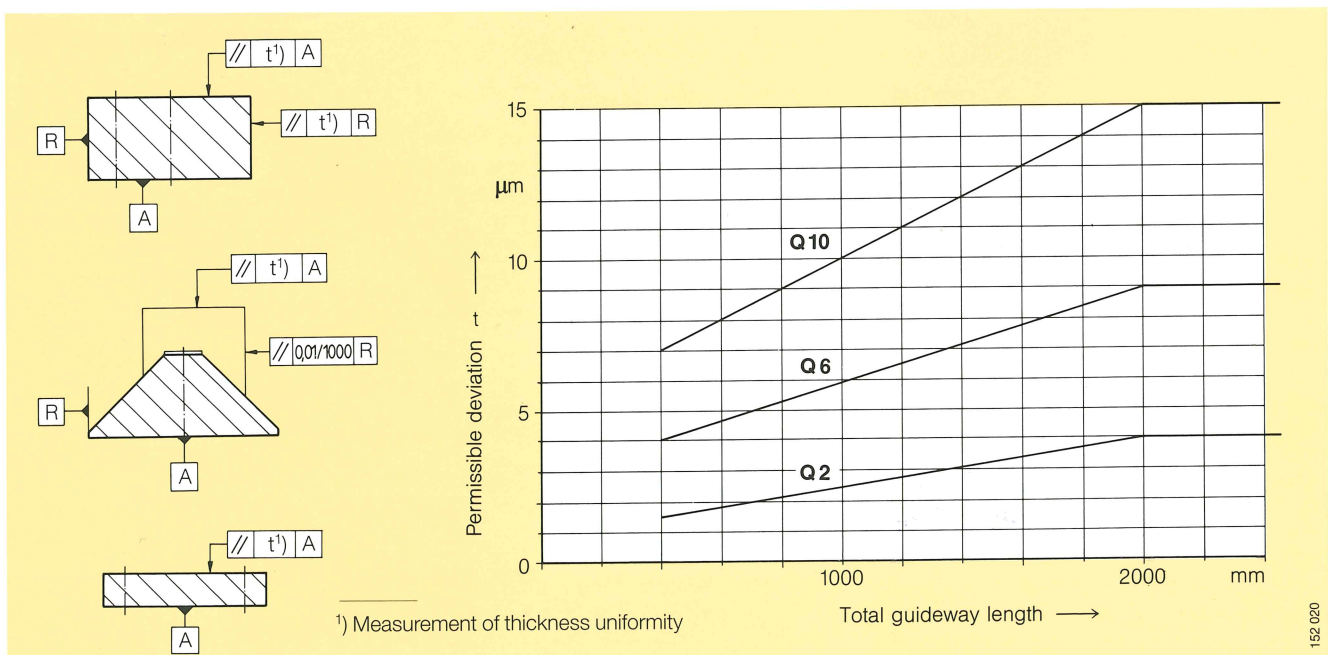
Tolerances for INA-HYDREL guideways
